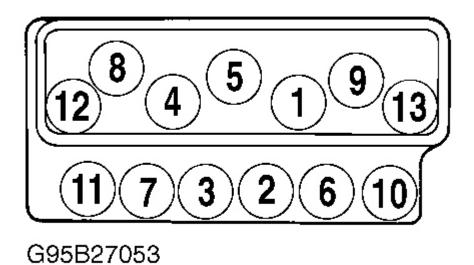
Identifying Cylinder Head Bolt Tightening Sequence (4.3L) Courtesy of GENERAL MOTORS CORP.
